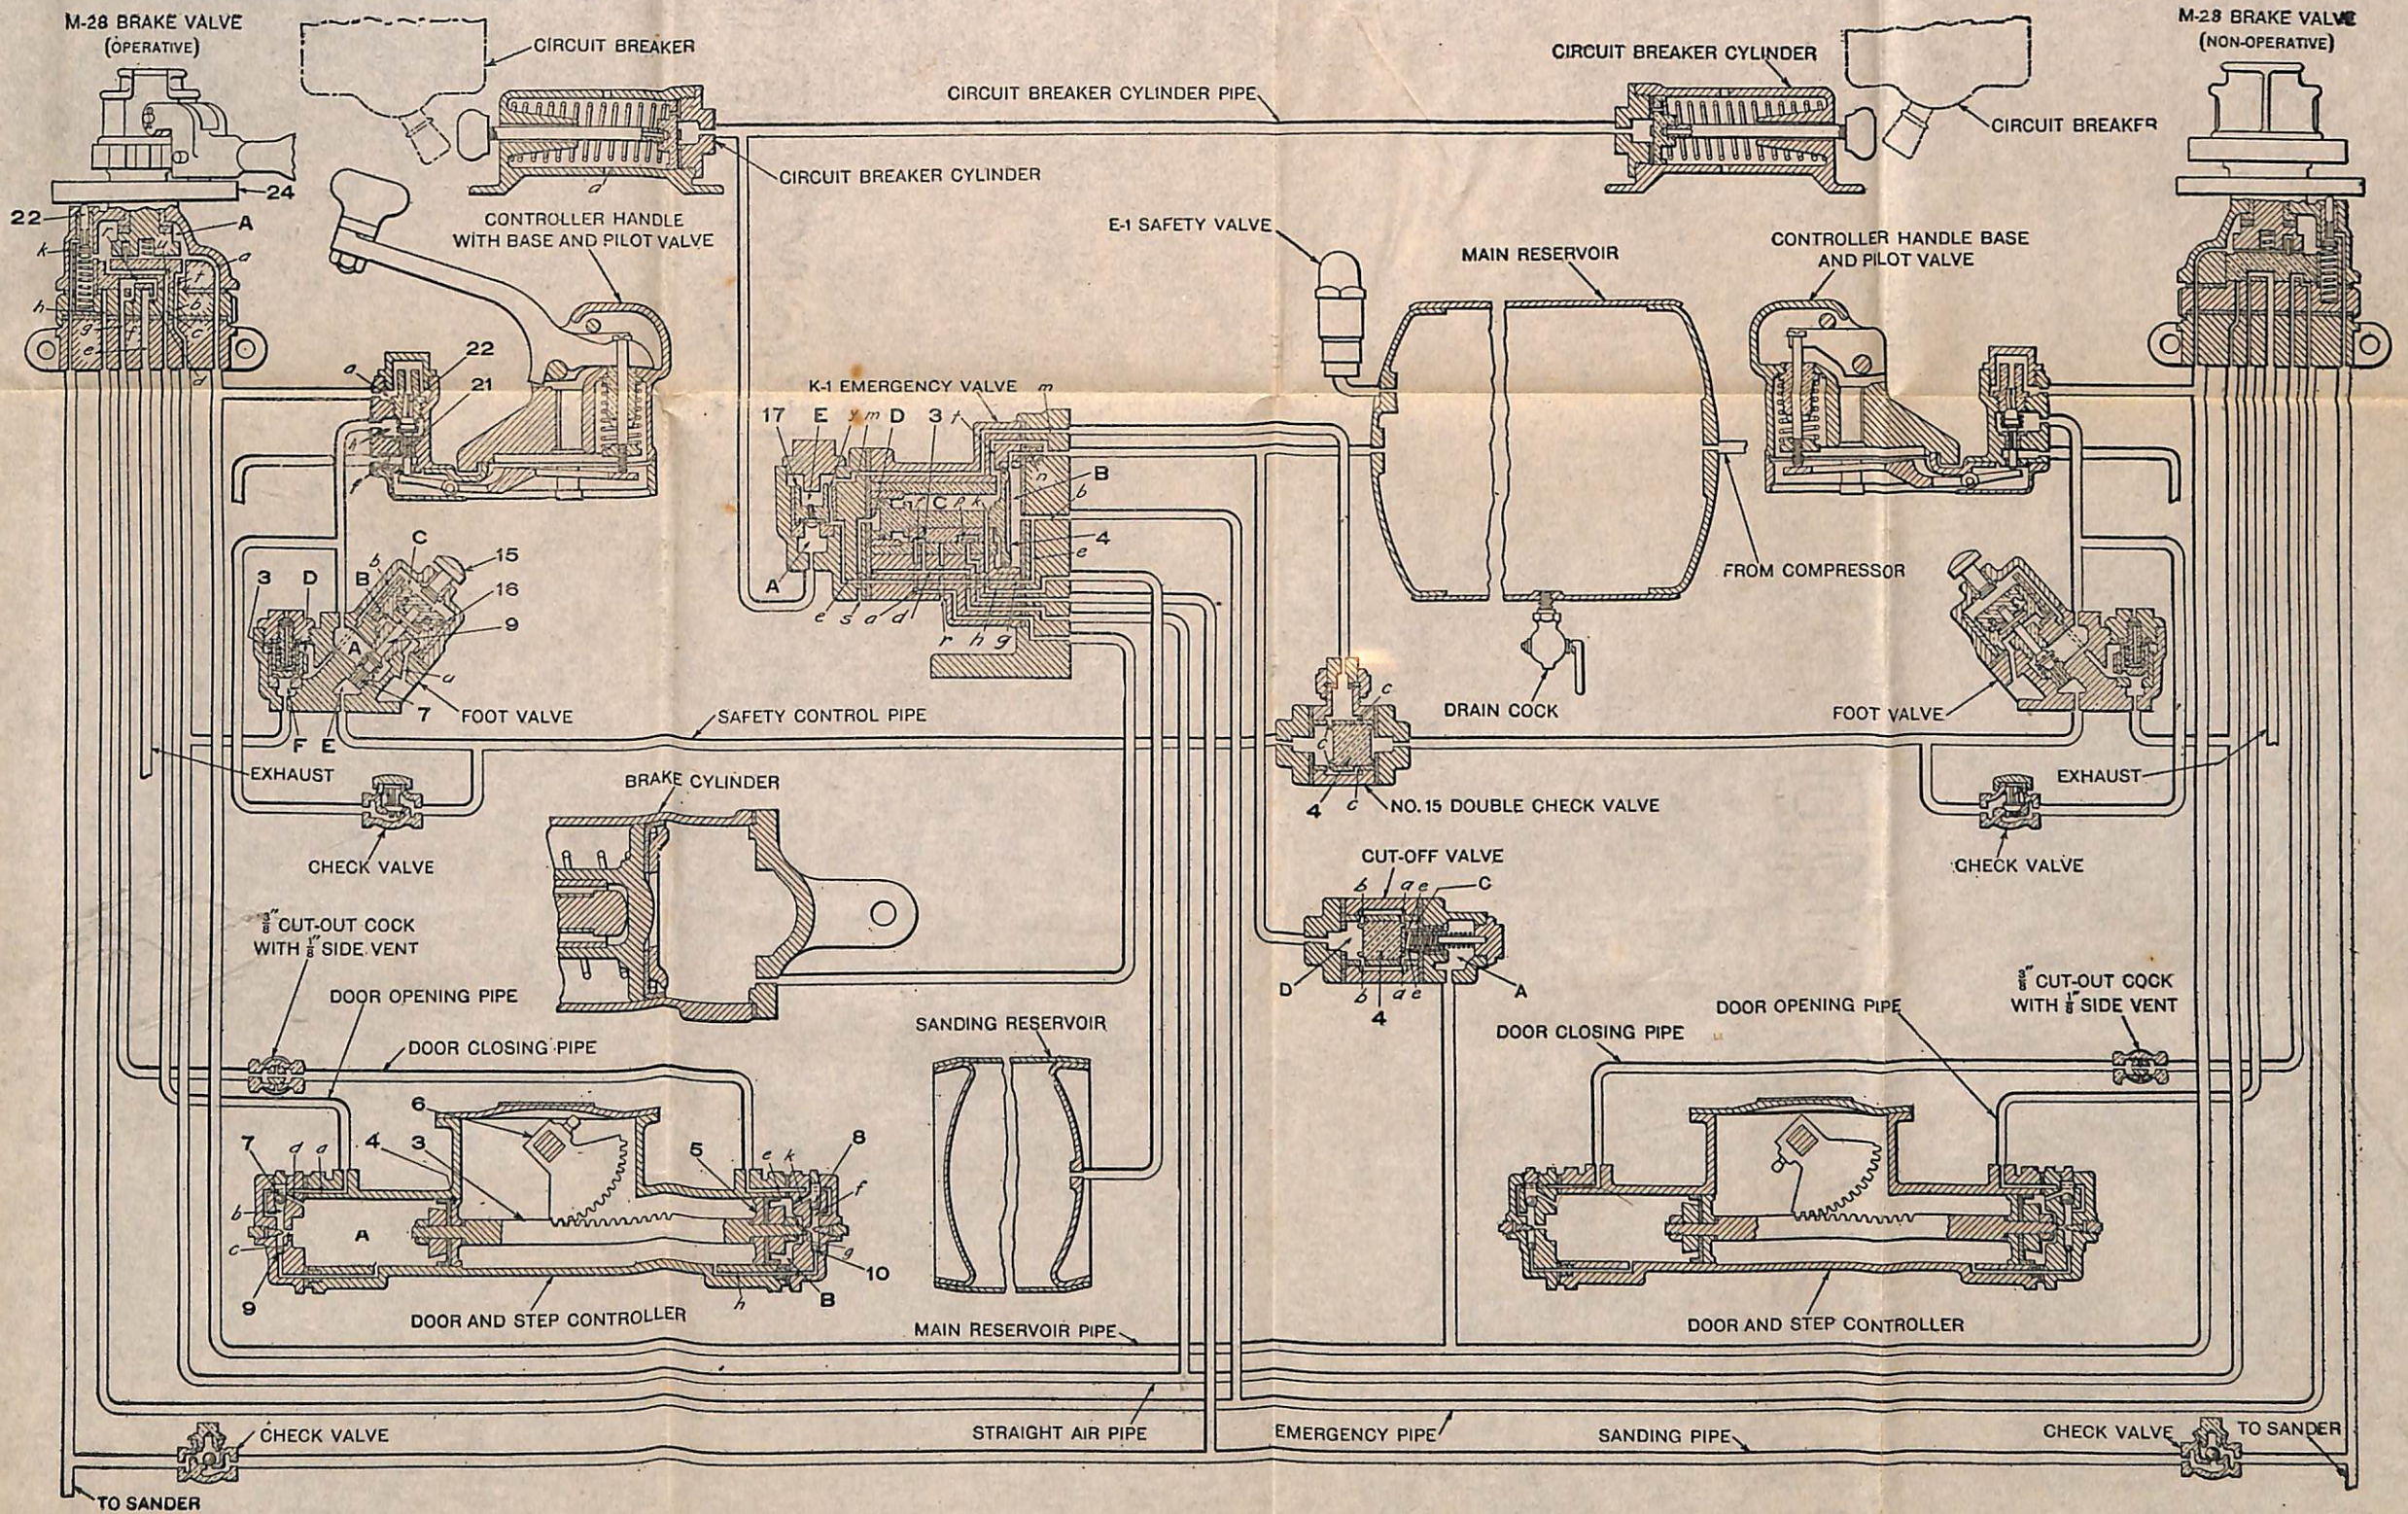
Diagrammatic View of Air Brake and Safety Car Control Equipment
